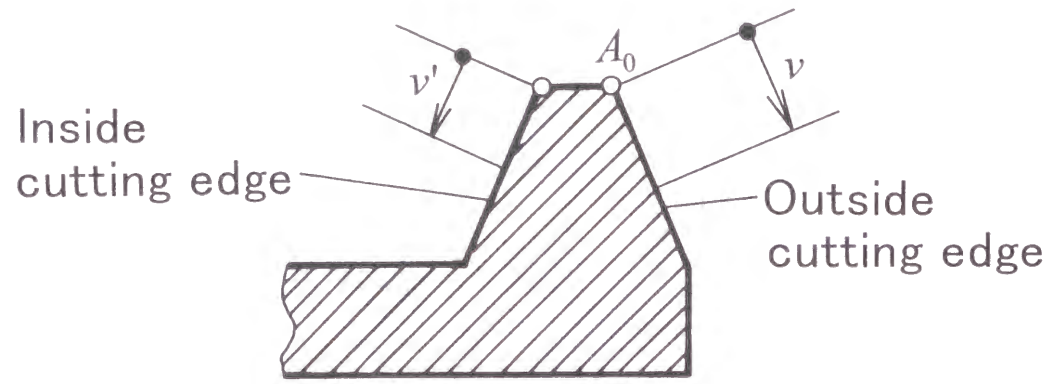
Shape of cutting edges of face-mill type of cutter in pinion cutting
